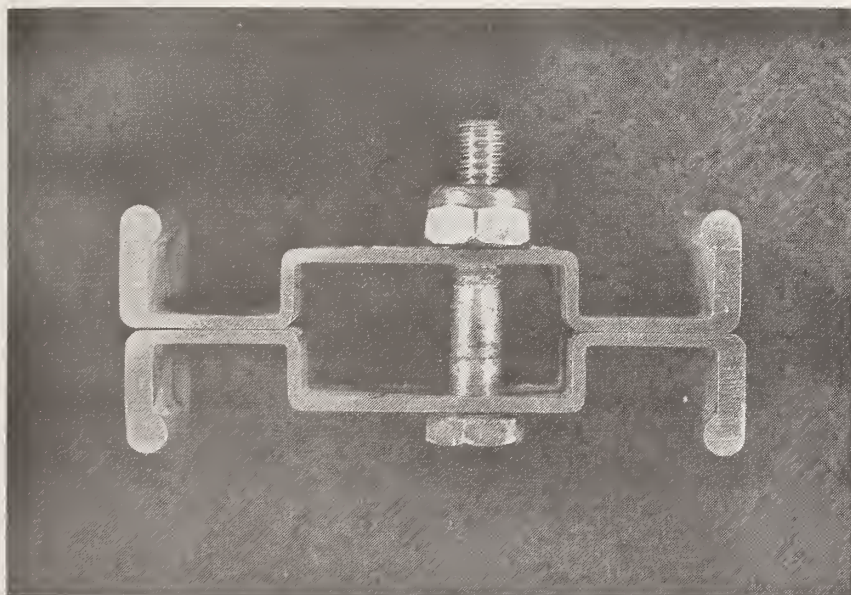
Cross section through one of the ladder rails showing the two extruded parts. These parts were riveted together. The bolt shown in the photograph was used to attach a fitting to the ladder.
